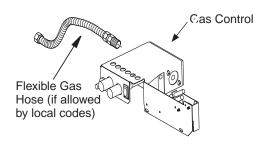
Attaching Flexible Gas Hose to Gas Regulator
